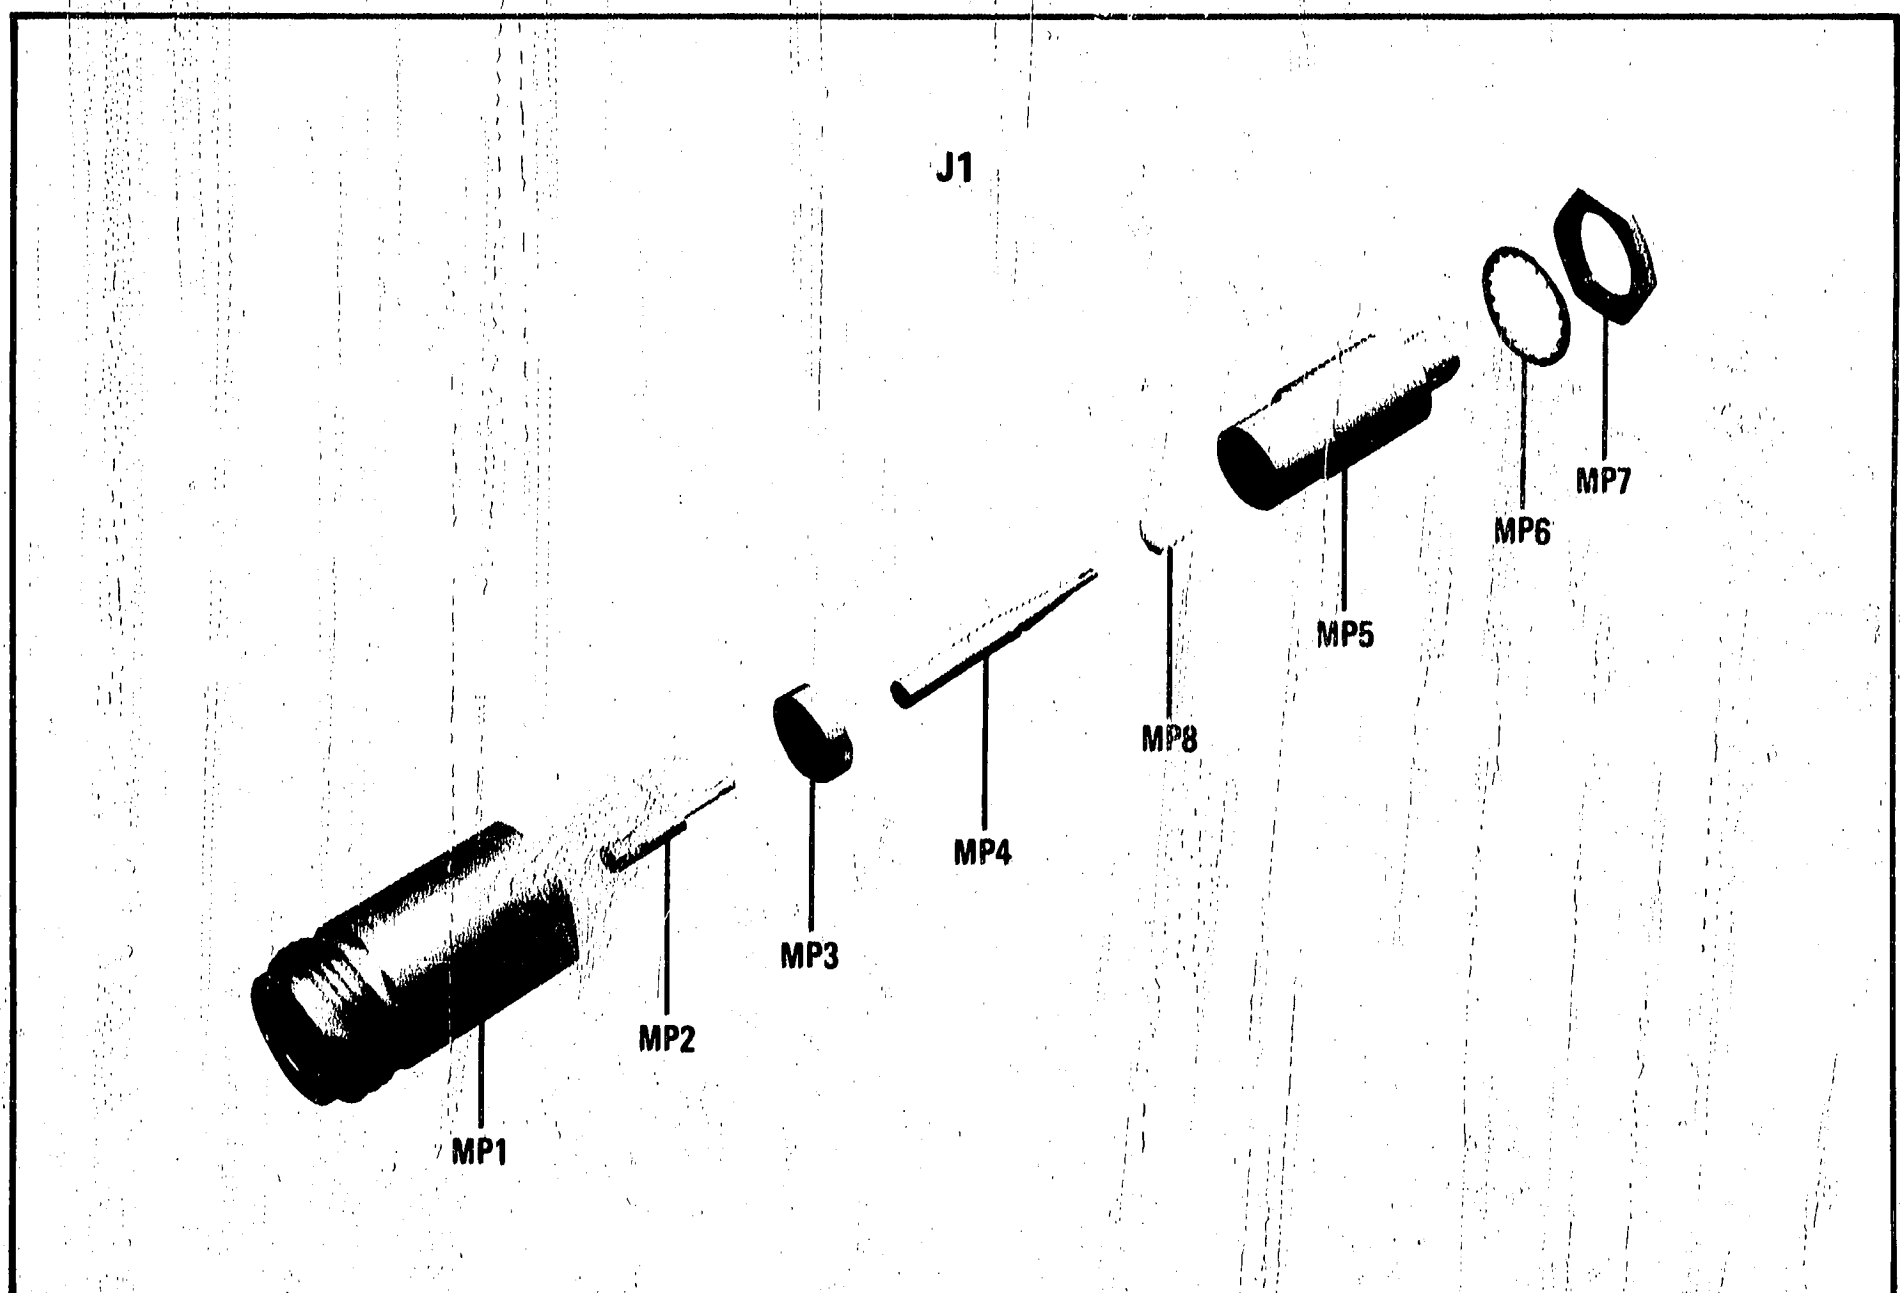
INPUT 50 $\Omega$  Connector J1, Exploded View
